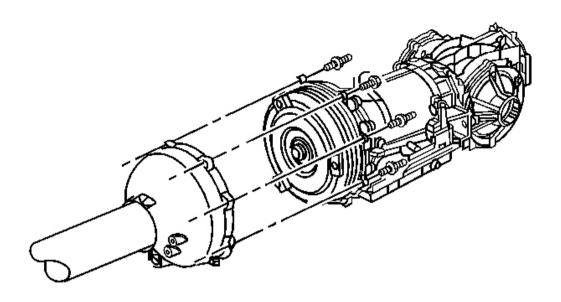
Driveline Support Assembly, Bolts & Studs Courtesy of GENERAL MOTORS CORP.
